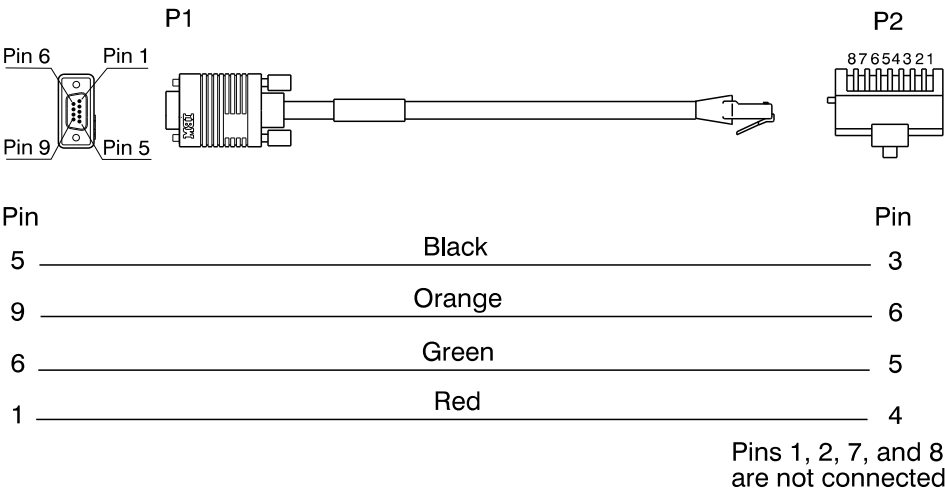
RJ45 Shielded DB9 Attachment Cable for 8250-6PS
